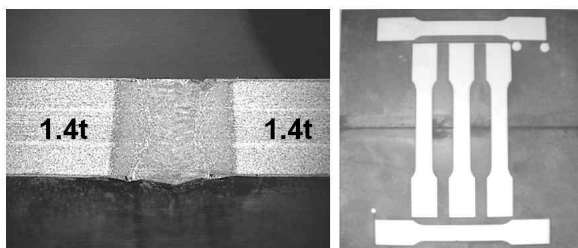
Cross section view of laser welded butt joint and collecting of tensile specimen
